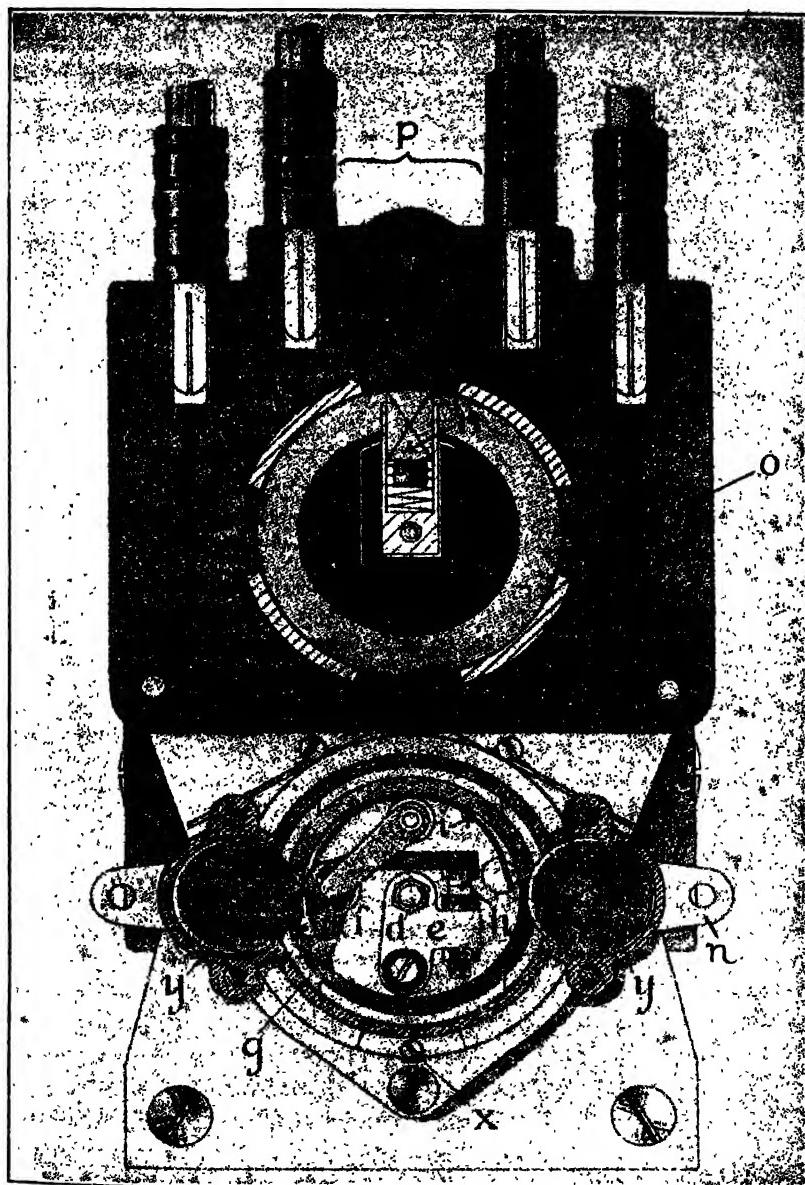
Front View of Bosch Magneto Showing Arrangement of Contact Breaker and Distributor Mechanism.
